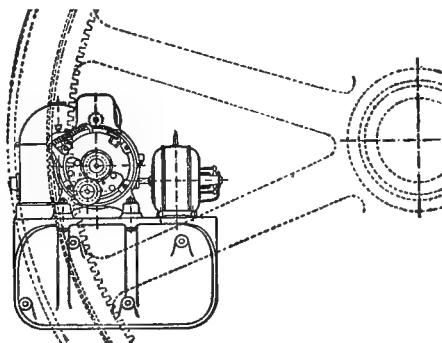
Electric Starting Outfit for Gas Engines up to Largest Size.
